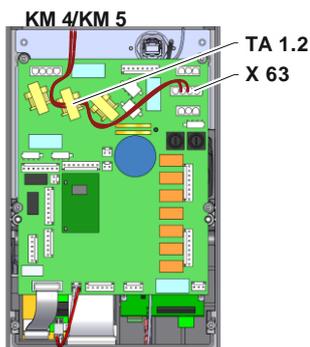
Cable routing housing size 3 pump G_, L_, 6_, 8
